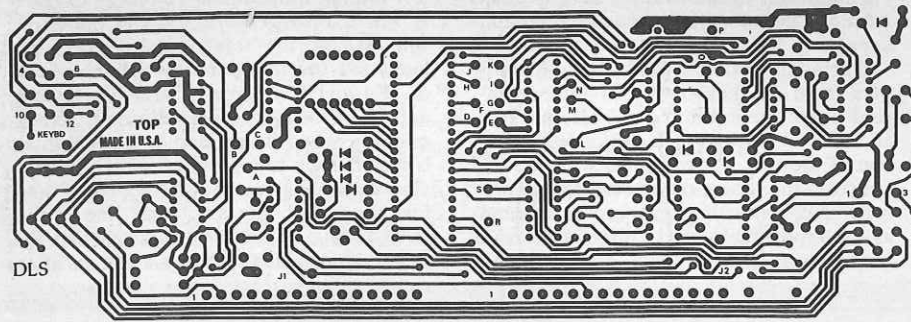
FOIL PATTERN of component side of double sided board shown 1/2 size.
